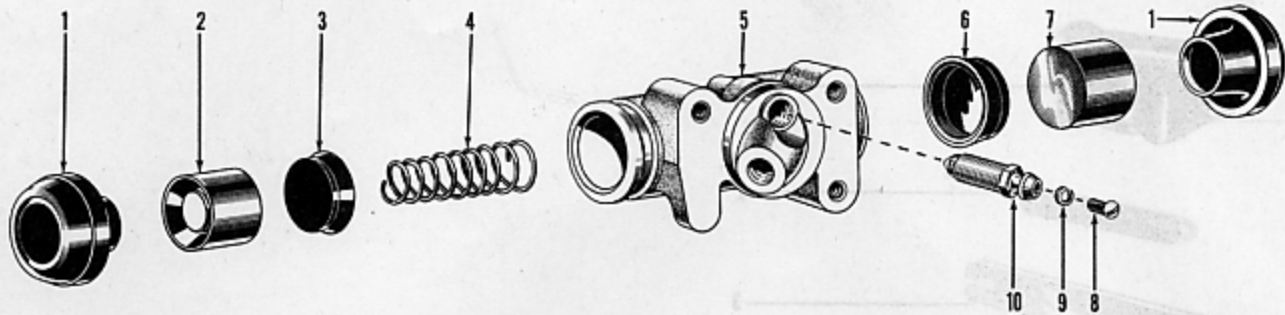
TYPICAL FRONT WHEEL BRAKE CYLINDER - EXPLODED VIEW
